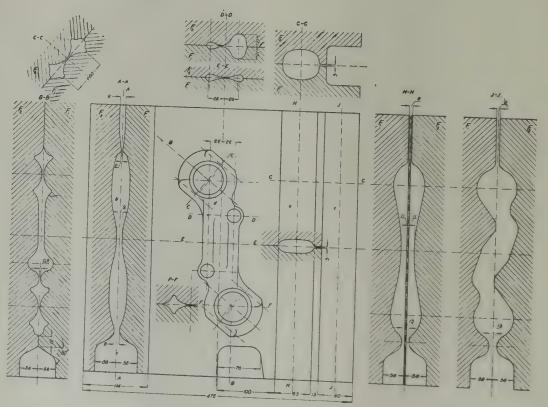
DIE WITH PRELIMINARY IMPRESSION DESIGN FOR PRODUCTION OF STANDARD MOTOR CAR CONNECTING ROD
